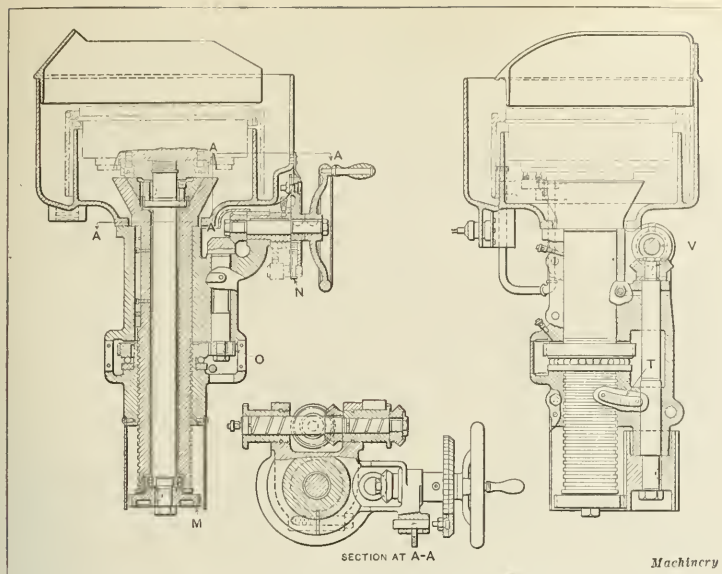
Sectional View of Work-spindle Knee, showing Feed Mechanism and Means for grinding Tapered Work
